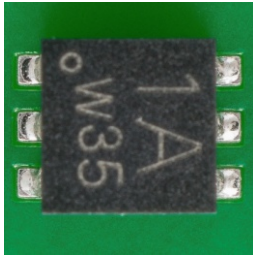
DFN2020MD-6 (SOT1220) with tin-plated wettable side pads (1-D191): Solder paste printing without fails
